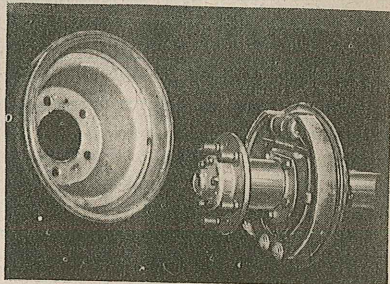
This easily removable brake drum allows you to clean the brakes without disturbing the wheel bearings.
